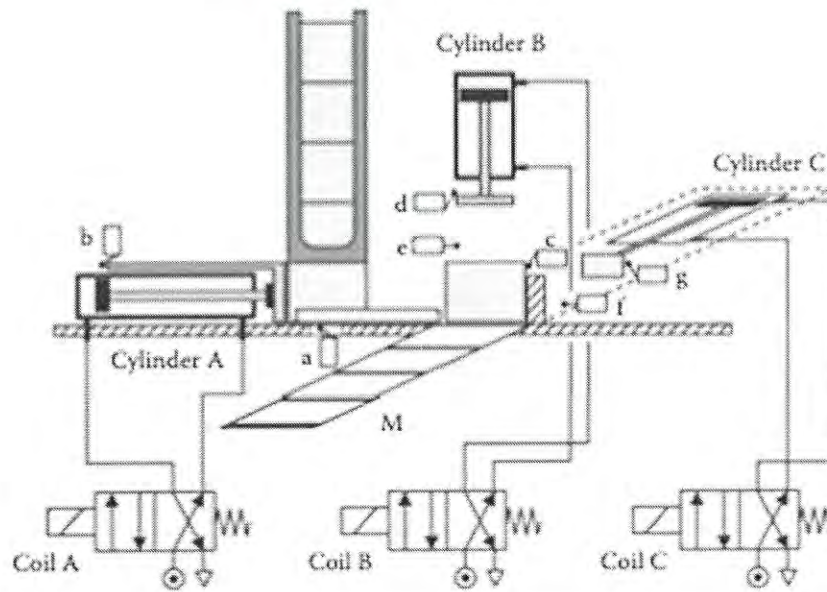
(b) Stamping Machine and pneumatic circuit of three cylinder
